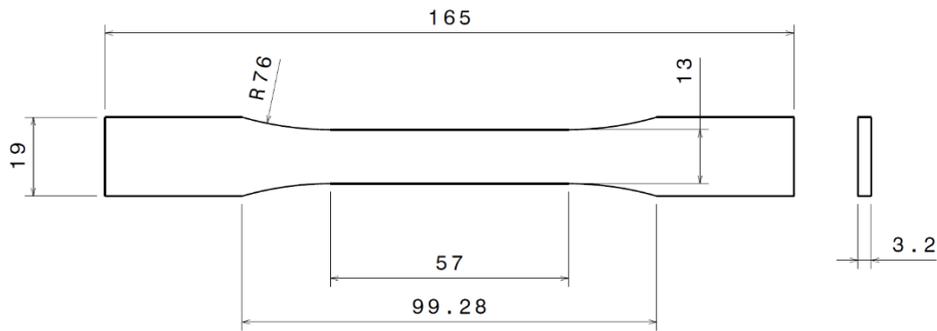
Dimensions of tensile strength specimen (in millimetres).
